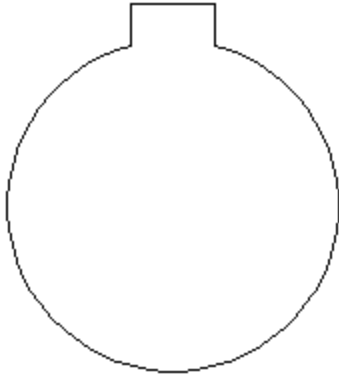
illustrates a 1/4" wide keyway in a 1" I.D. hub. Side view not available. Insertion point is the center of the hub diameter. Tool & Die Helper For AutoCAD LT will draw hub diameter.
